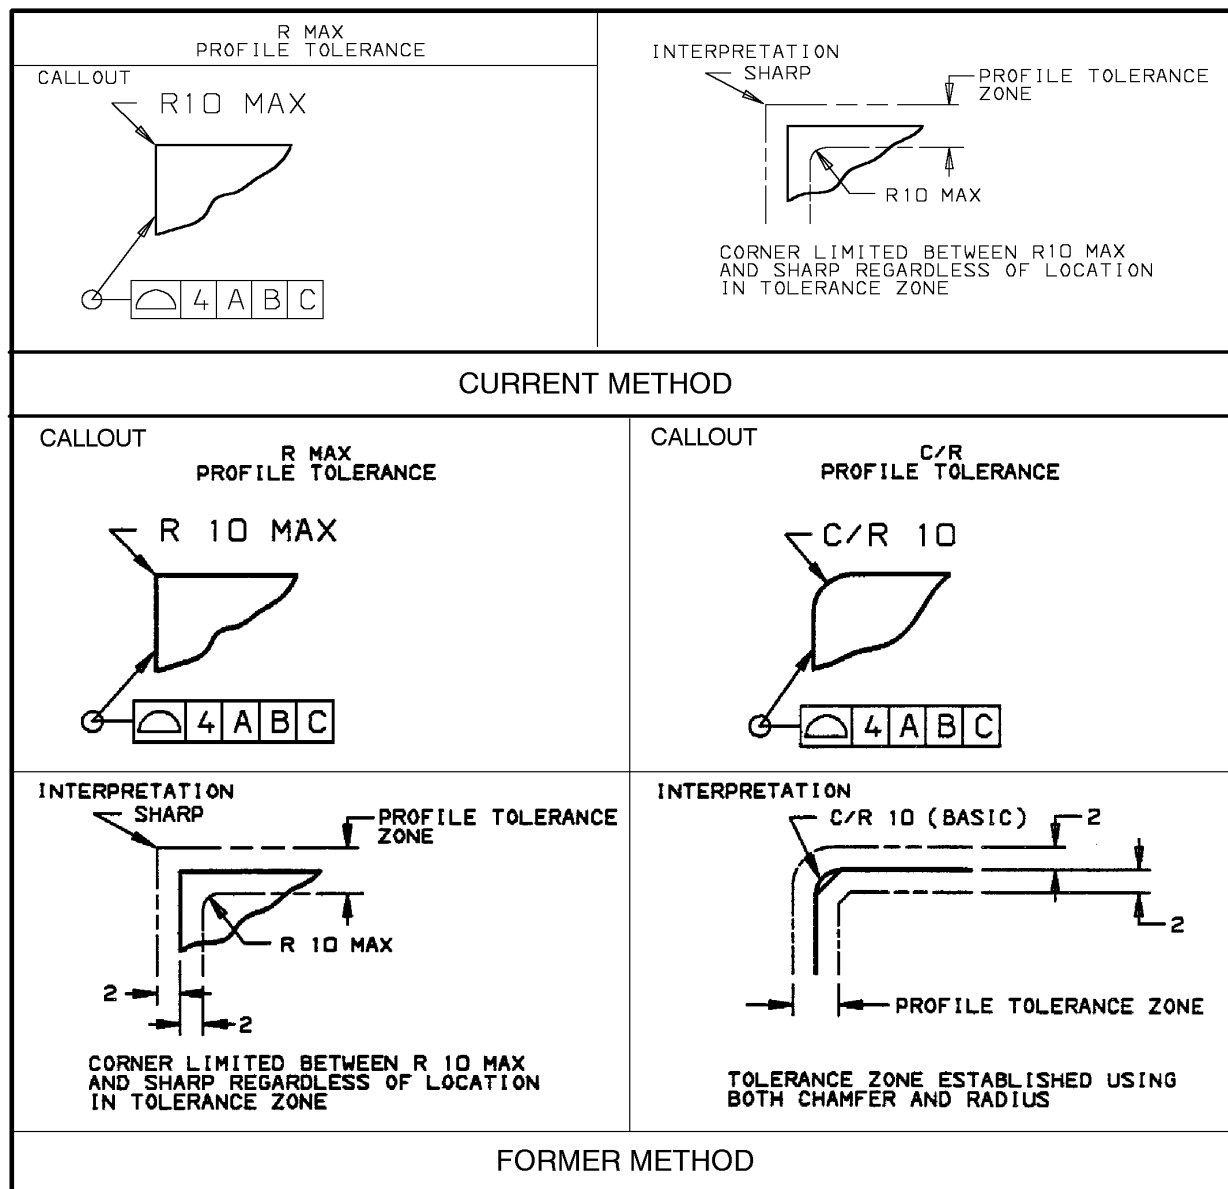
Maximum Radius With Profile Tolerances
